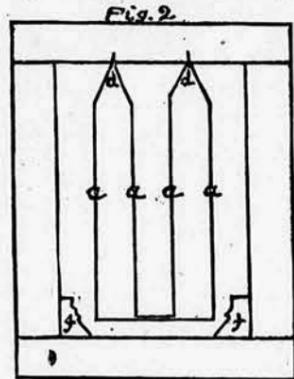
Front end view of trap. Scale about three times that of the longitudinal section, in order to show details of door.
